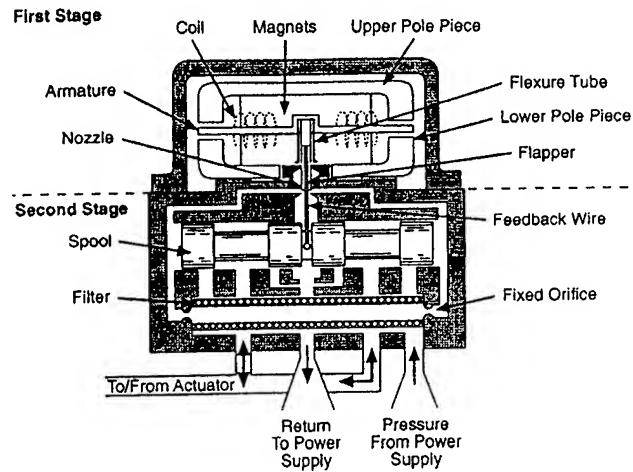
Cross section of a traditional servovalve (MTS model 252). The flapper and flexure tube may be subject to fatigue failure.
